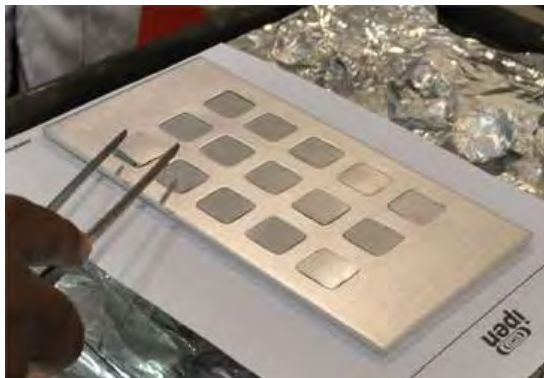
Photograph illustrating the assembly of multiple meats in the frame plate to be rolled for producing multiple targets
